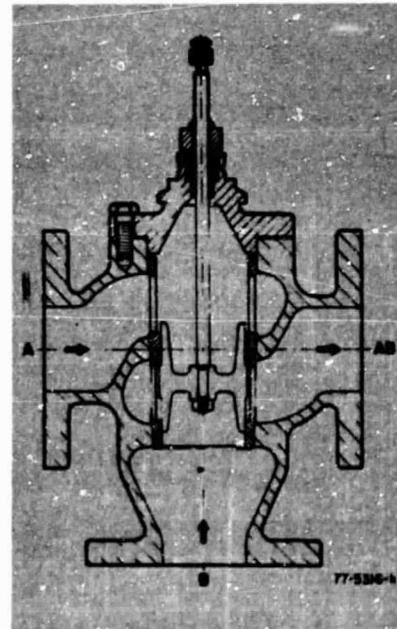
V5013B & D THREE-WAY MIXING VALVE
